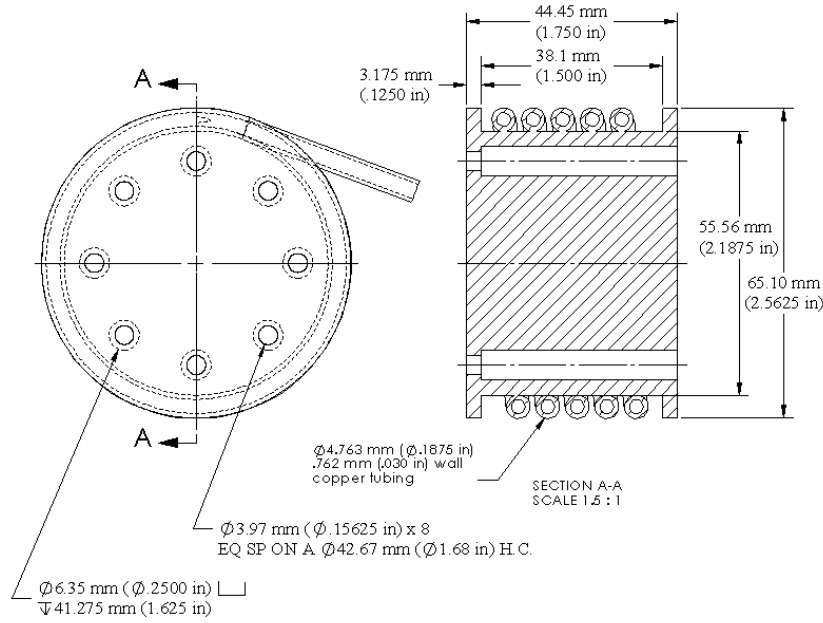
Detailed drawing of the cryocooler heat exchanger
